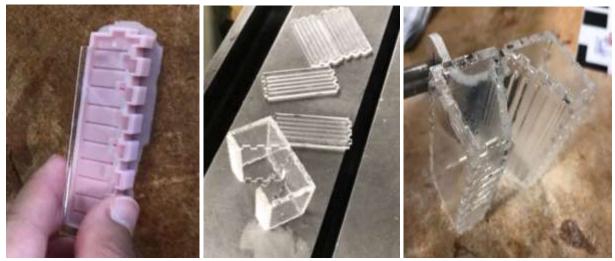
Silicone mold of bottom plate with grooves (left), finished interior plates with resin grooves (middle), finished cutting tool (right).
